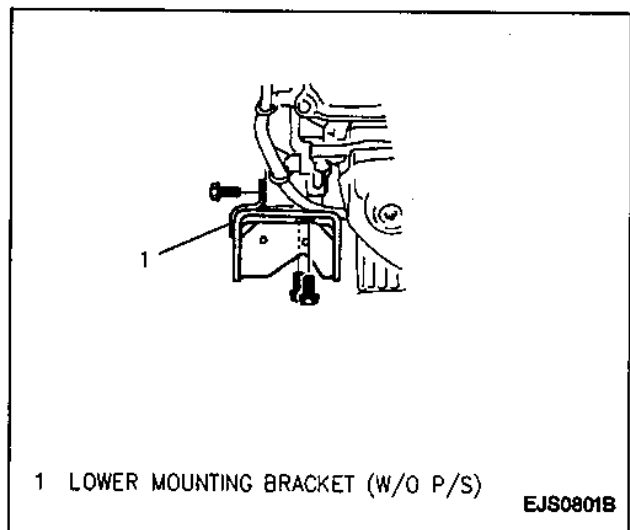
Compressor Lower Mounting Bracket (without Power Steering)
